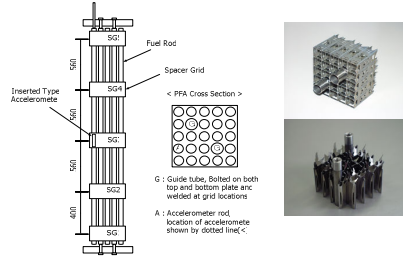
Axial and cross sectional layouts of the test bundle and picture of the 5x5 spacer grids.
